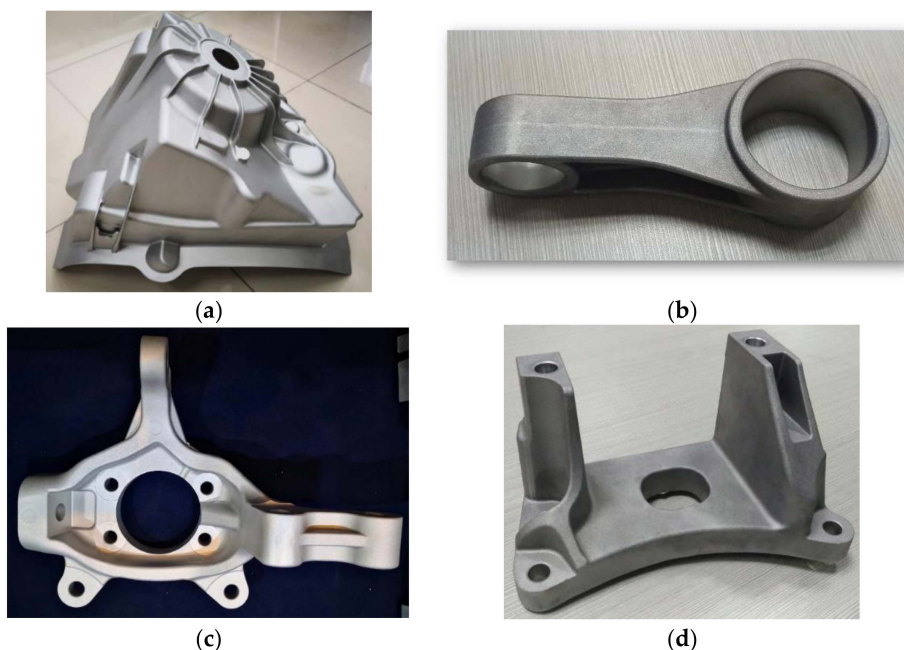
Automotive parts, various stages of acceptance, China. (a) End motor cover; (b) torque link; (c) knuckle arm; (d) engine support (Courtesy Qiang Zhu, GRINM) [45].
